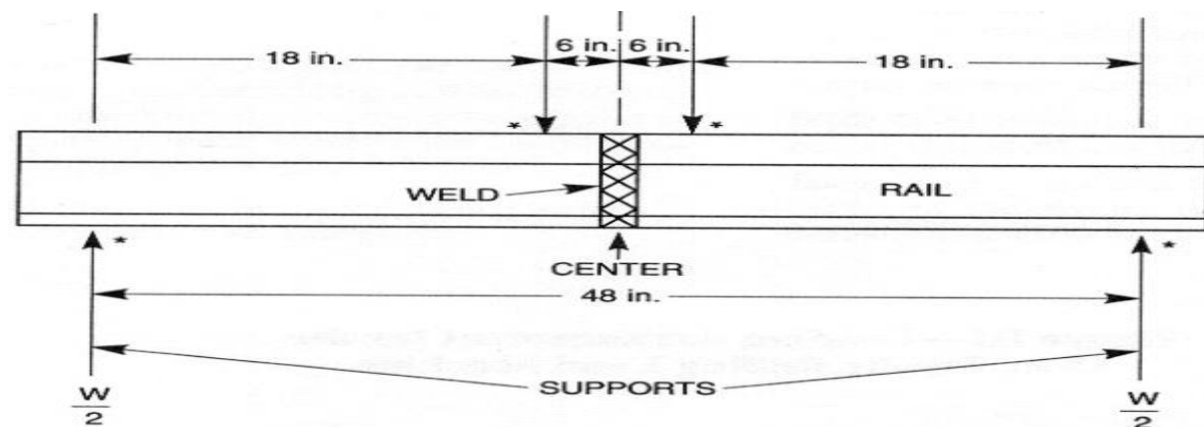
four-point bend test scheme suggested by the ANSI/AWS D15.2-94[33]
